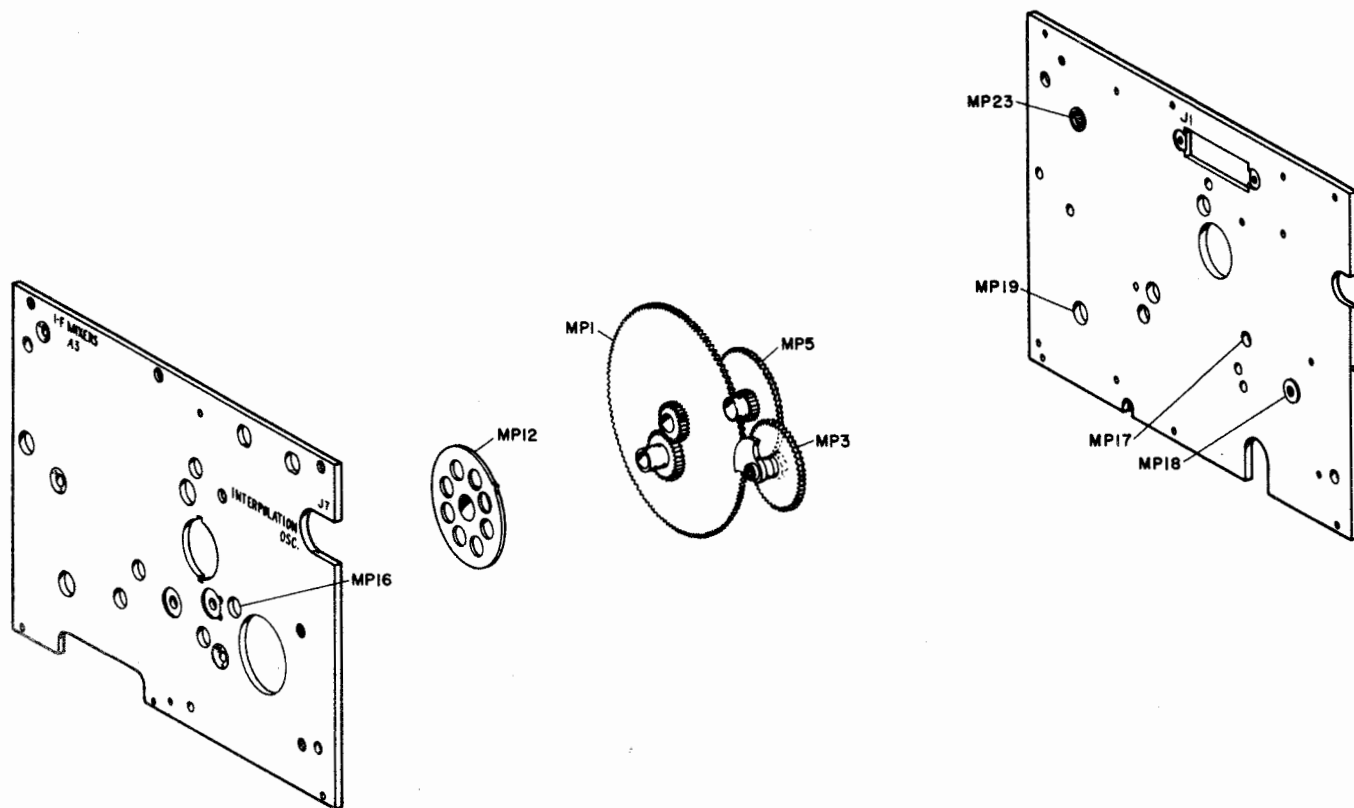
Stabilized Master Oscillator, Gear and Bearing Location
